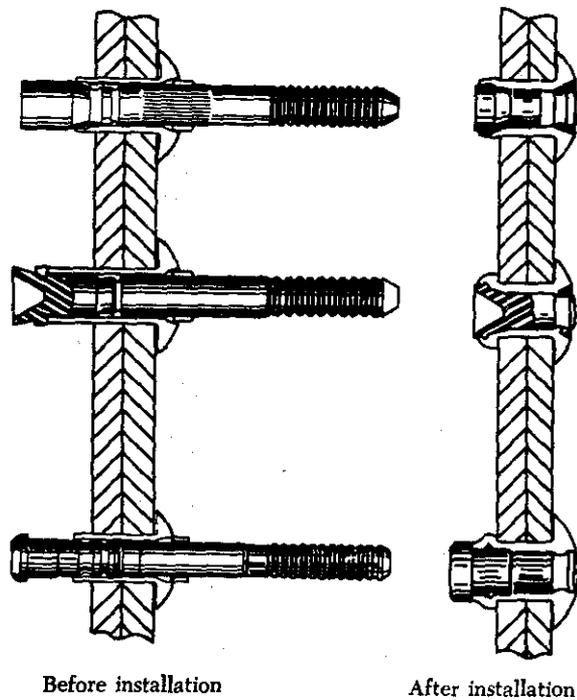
Self-plugging, mechanical lock rivets.
